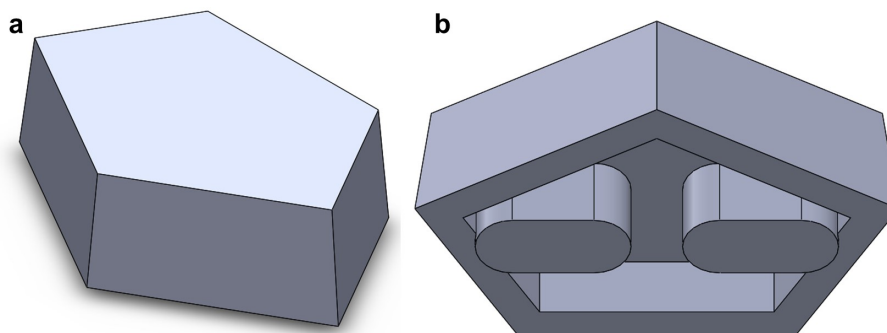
3D model of the 3D-printed inserts used for Mold 2. a: Representation showing the pentagonal shape and taper of the insert. b: Bottom view of the insert with the two pins used for alignment with the SU-8 layer while gluing.
